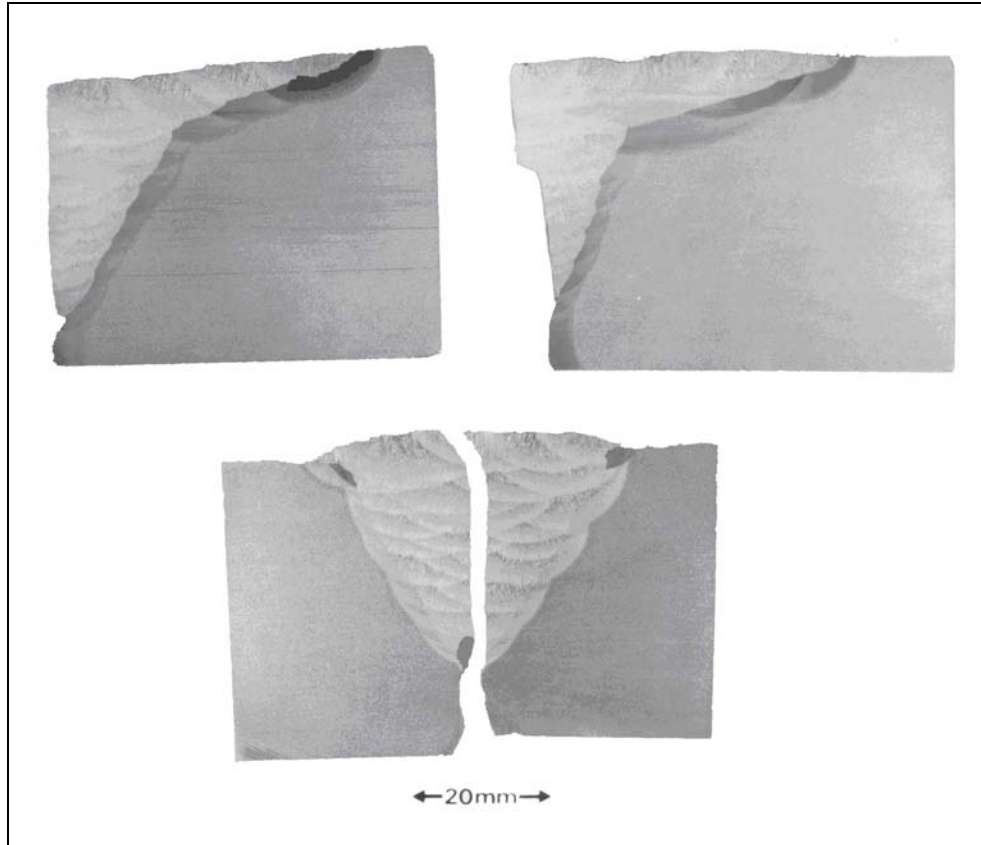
Doubler Strap Butt Welds with Insufficient Penetration
